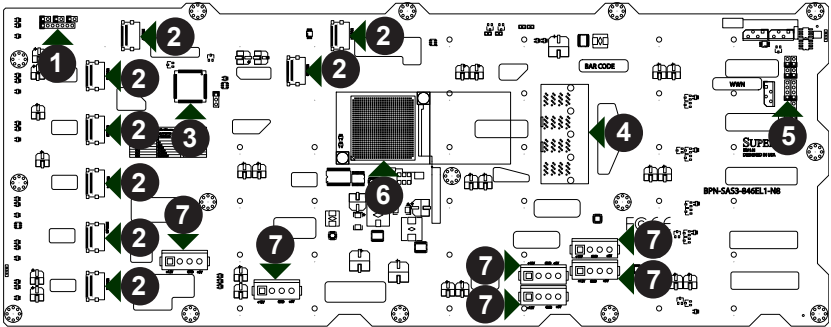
BPN-SAS3-846EL1-N8 Expander Chip Side Components
